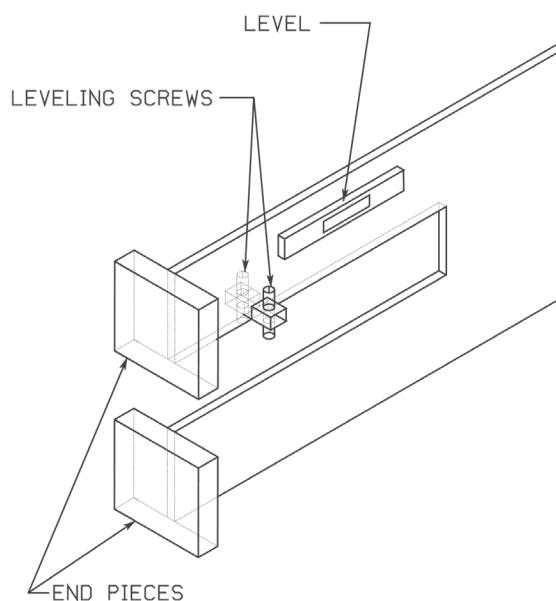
Sketch of the fixture for lateral alignment of uranium metal cylinders.
